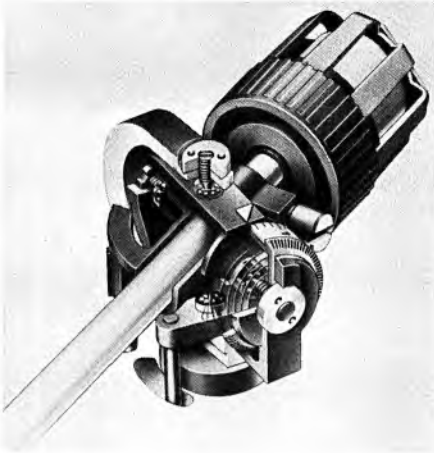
Exploded view of Dual 701 motor, showing the elements of its design
